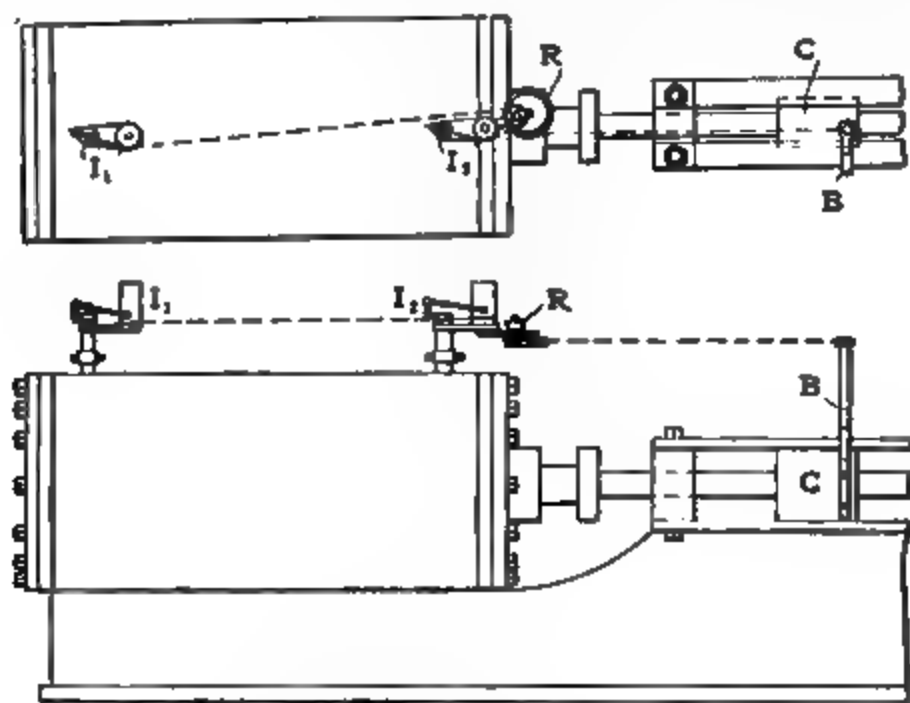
Single Reducing Wheel Driving Two Indicators.
